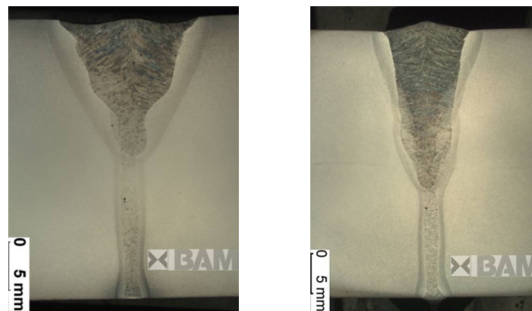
28 mm 2 layers (left) and 32 mm 5 layers (right) multi-pass welds.
